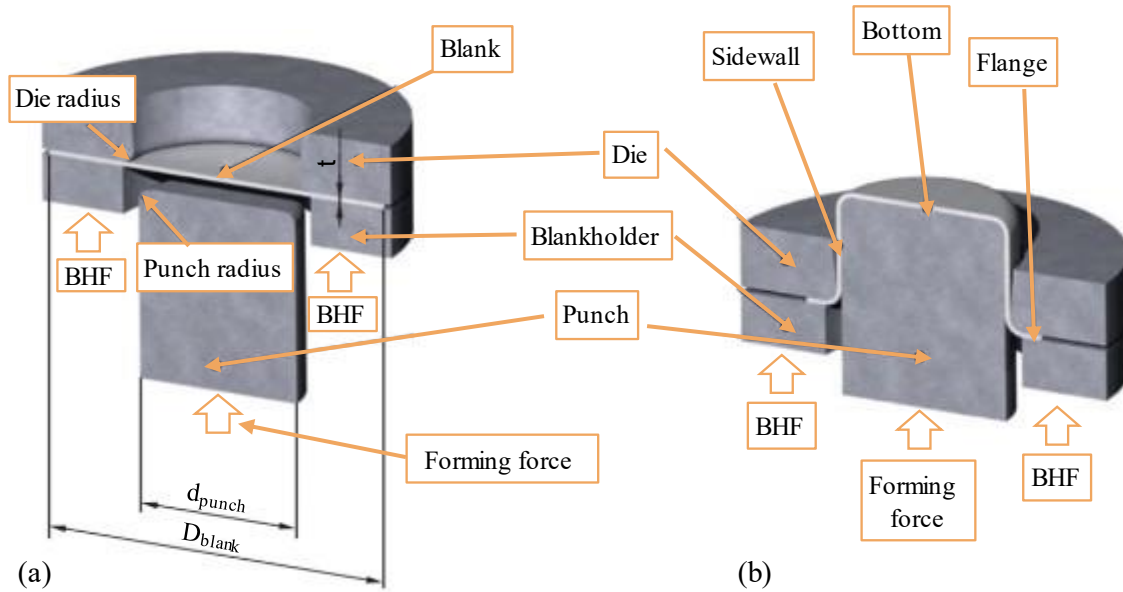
(a) A cup-shaped tool as a basic example of deep drawing and (b) deformation zones of deep-drawn component [81]
